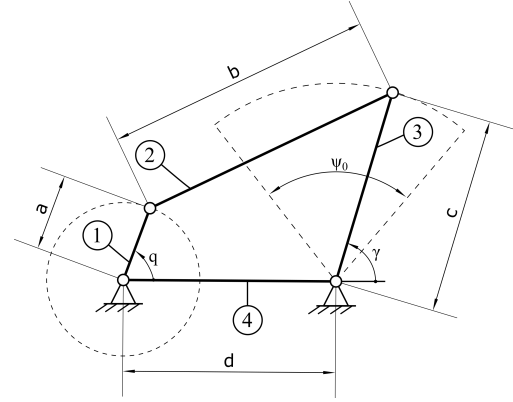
Illustration of a crank rocker mechanism, with its components: crank (1), coupler (2), rocker arm (3) and frame (4) [16]
